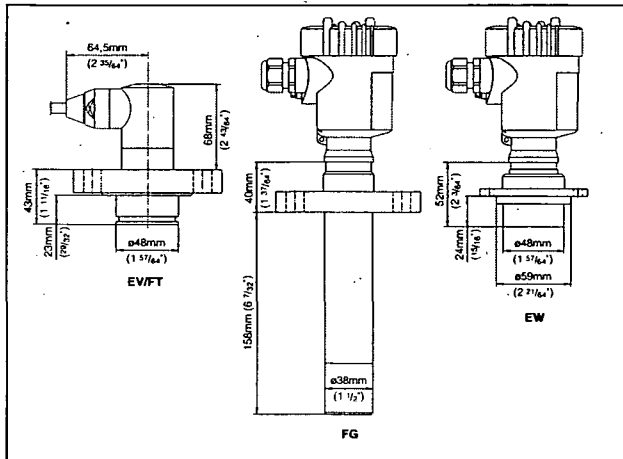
VEGABAR 64 extension fitting for paper industry: EV/FT = absolutely flush for pulper (EV 2-times flattened), FG = extension for ball valve fitting, EW = flange for manometer lug
